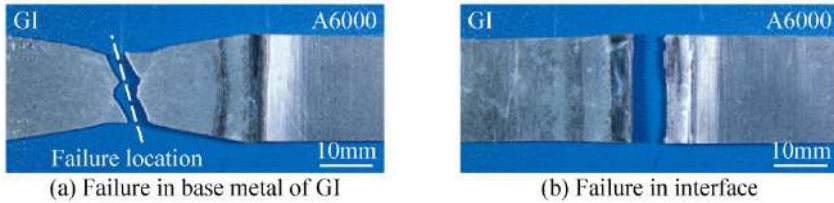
Tensile shear specimen after testing of GI/A6000 Laser Roll Welded joints
